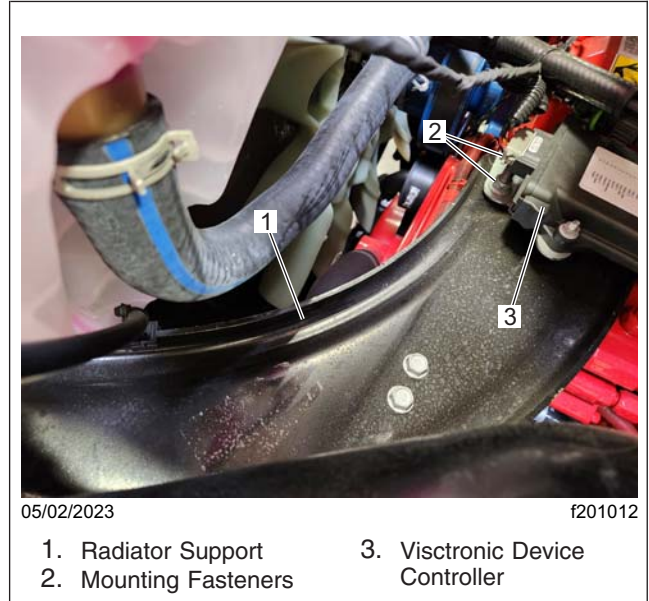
, Visctronic Device Controller Mounted on the Radiator Support
